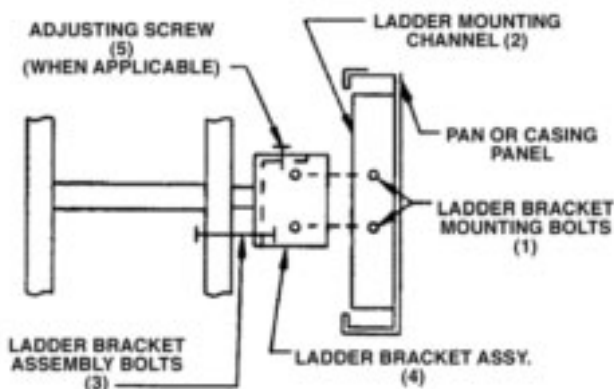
Detail of Ladder, Ladder Bracket Assembly and Mounting Channel
